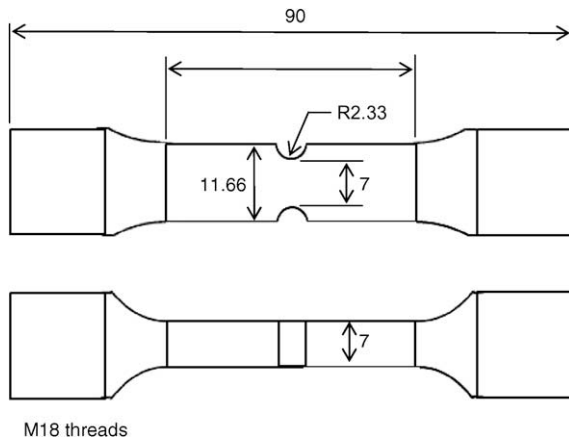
Double edge notch specimen geometry (dimensions in mm).
